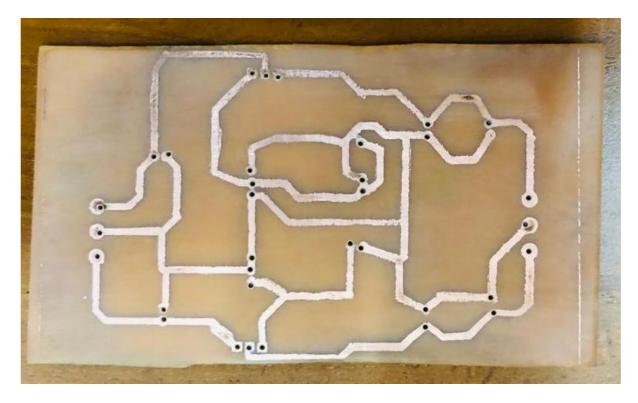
After Drilling the PCB and Getting the traces in PCB
